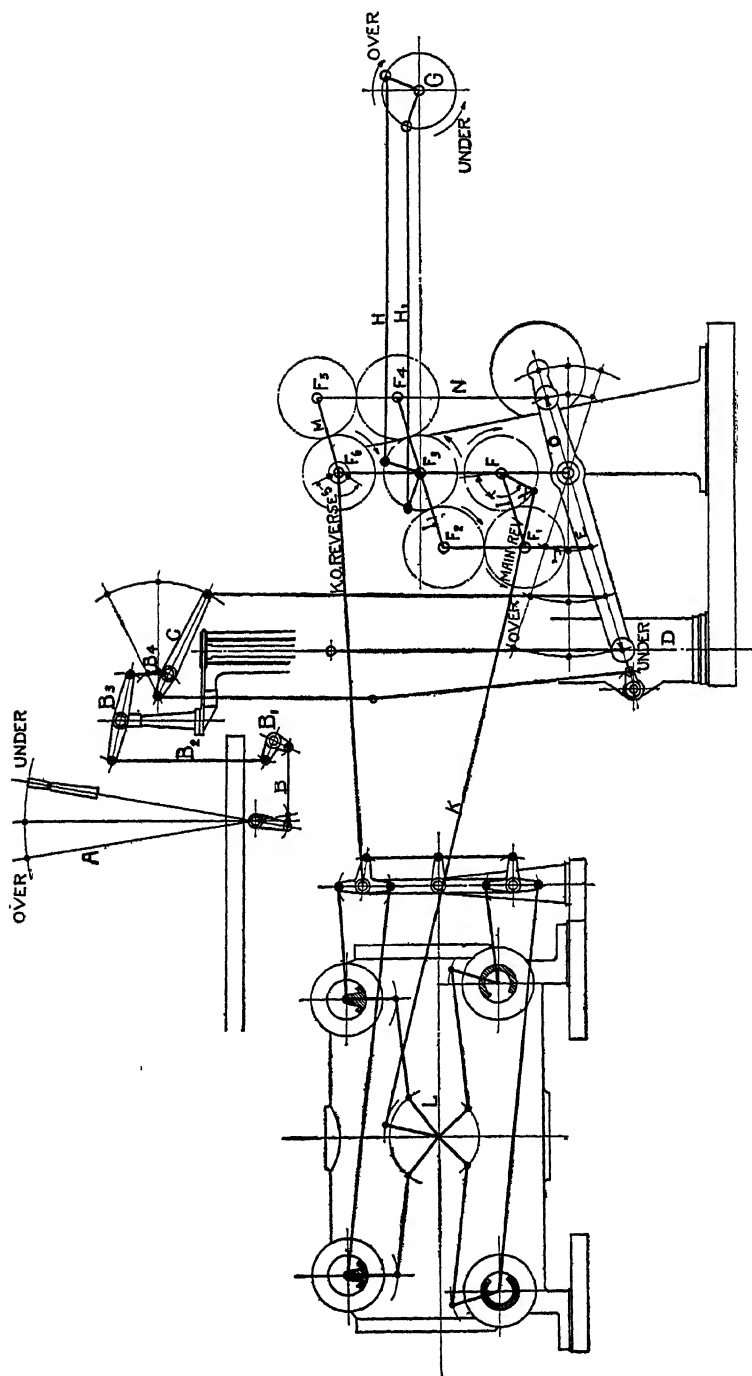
DIAGRAM OF REVERSING GEAR.
